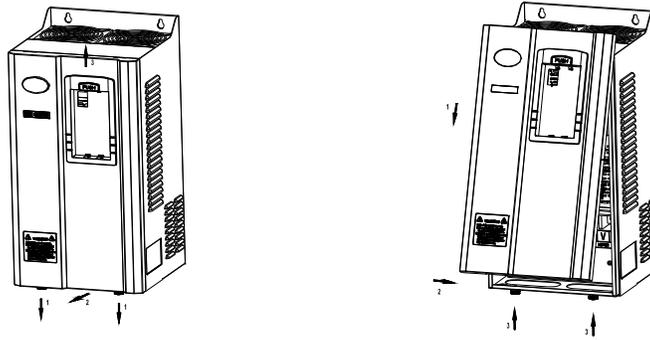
5 Cover removal & installation of the wall-mounted sheet metal housing AC drive
